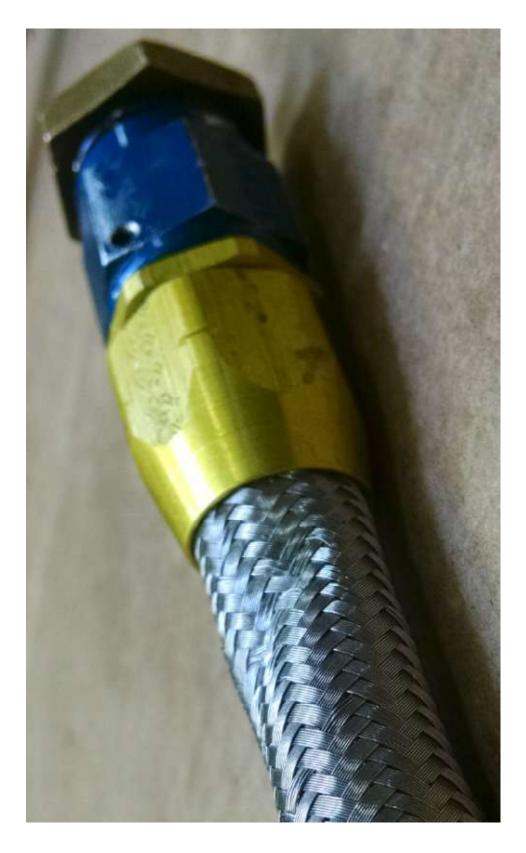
Figure VII Slight crimp in the 1/2" stainless steel over braided flexible fluid line
